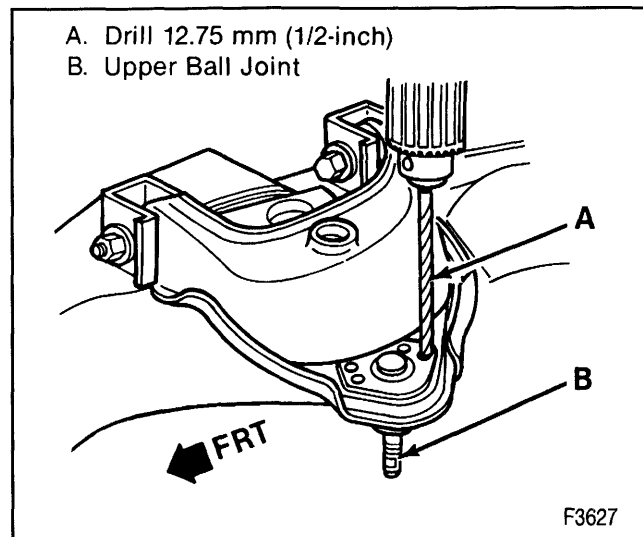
Drilling the Upper Ball Joint Rivet Heads
